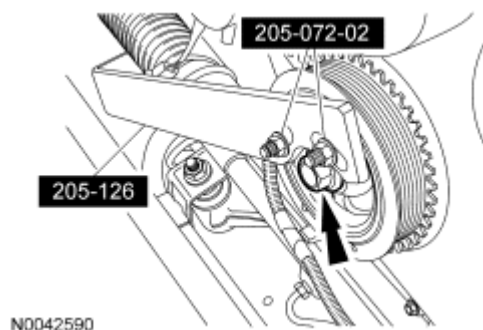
Assembling Special Tools (205-126 And 205-072-02)
